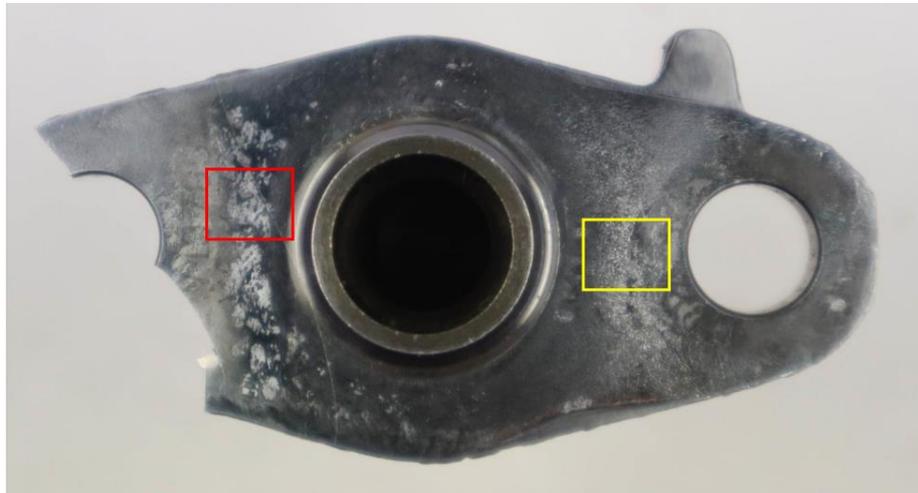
The red and yellow squares show wear on the idler gear shaft flange.
